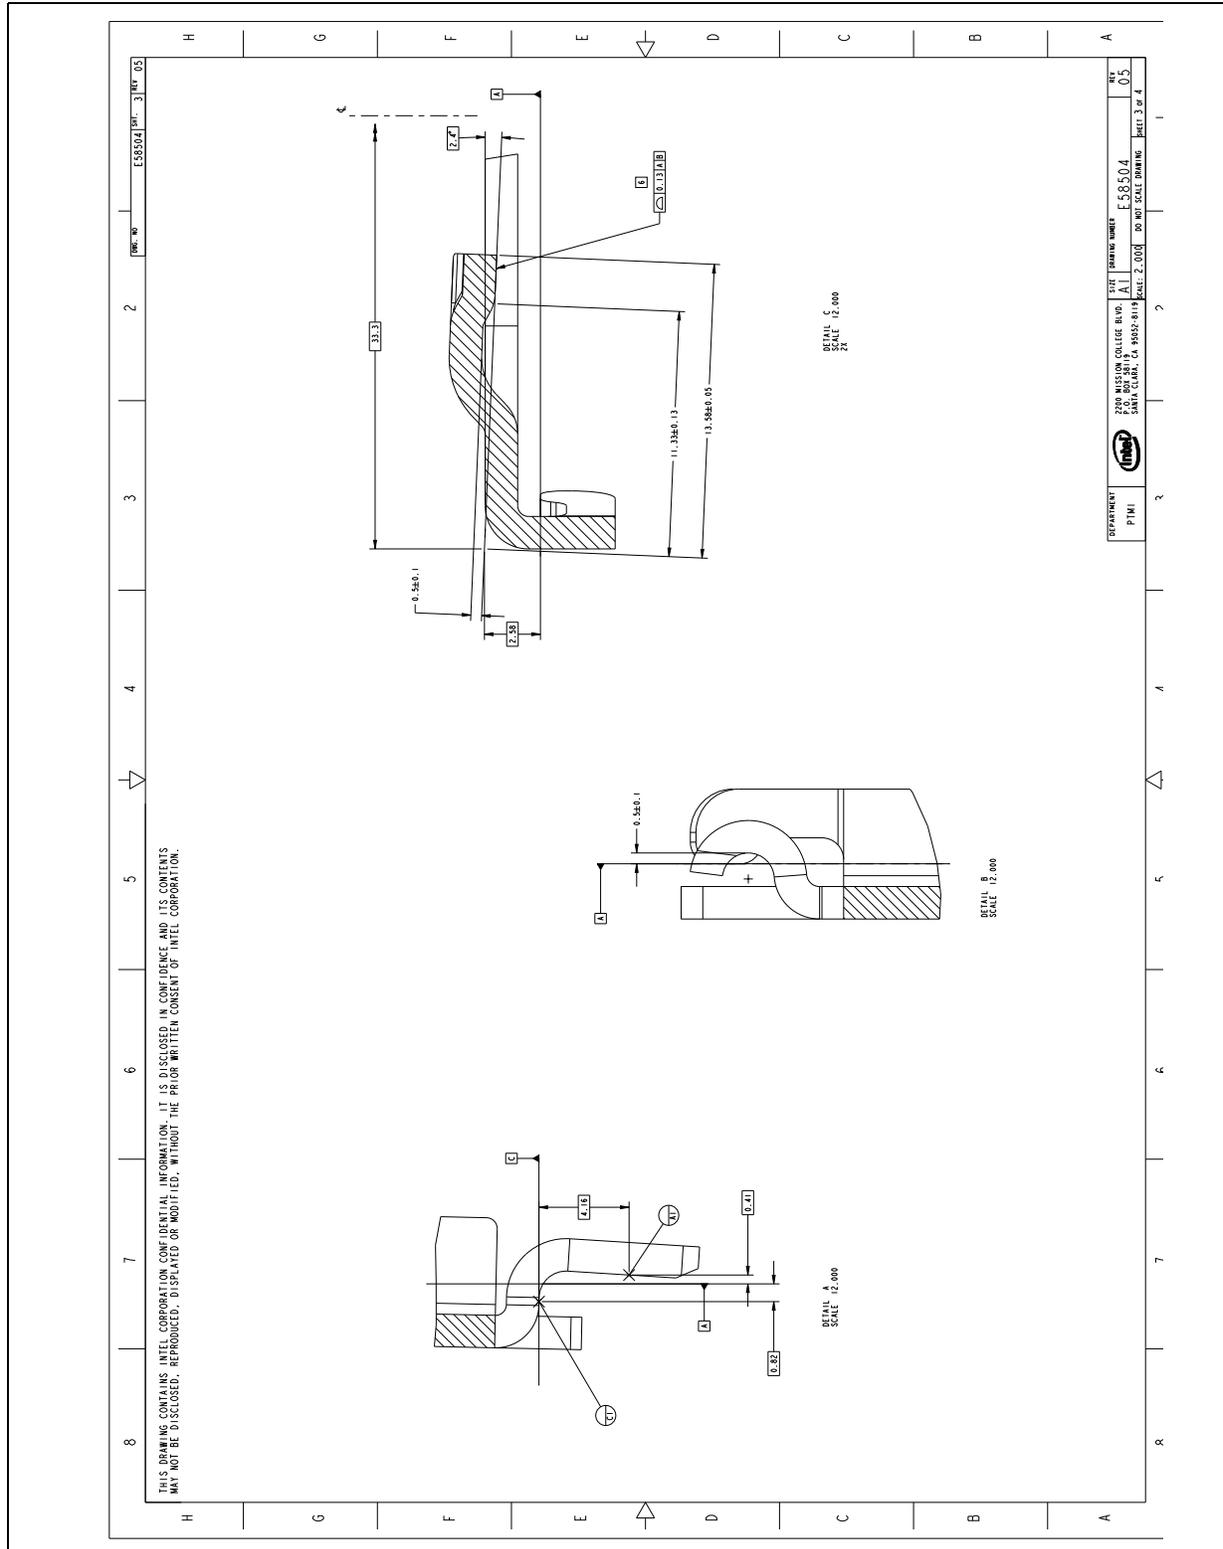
Low-Profile Independent Loading Assembly (LP-ILM) Mechanical Drawing – Sheet 6 of 8
